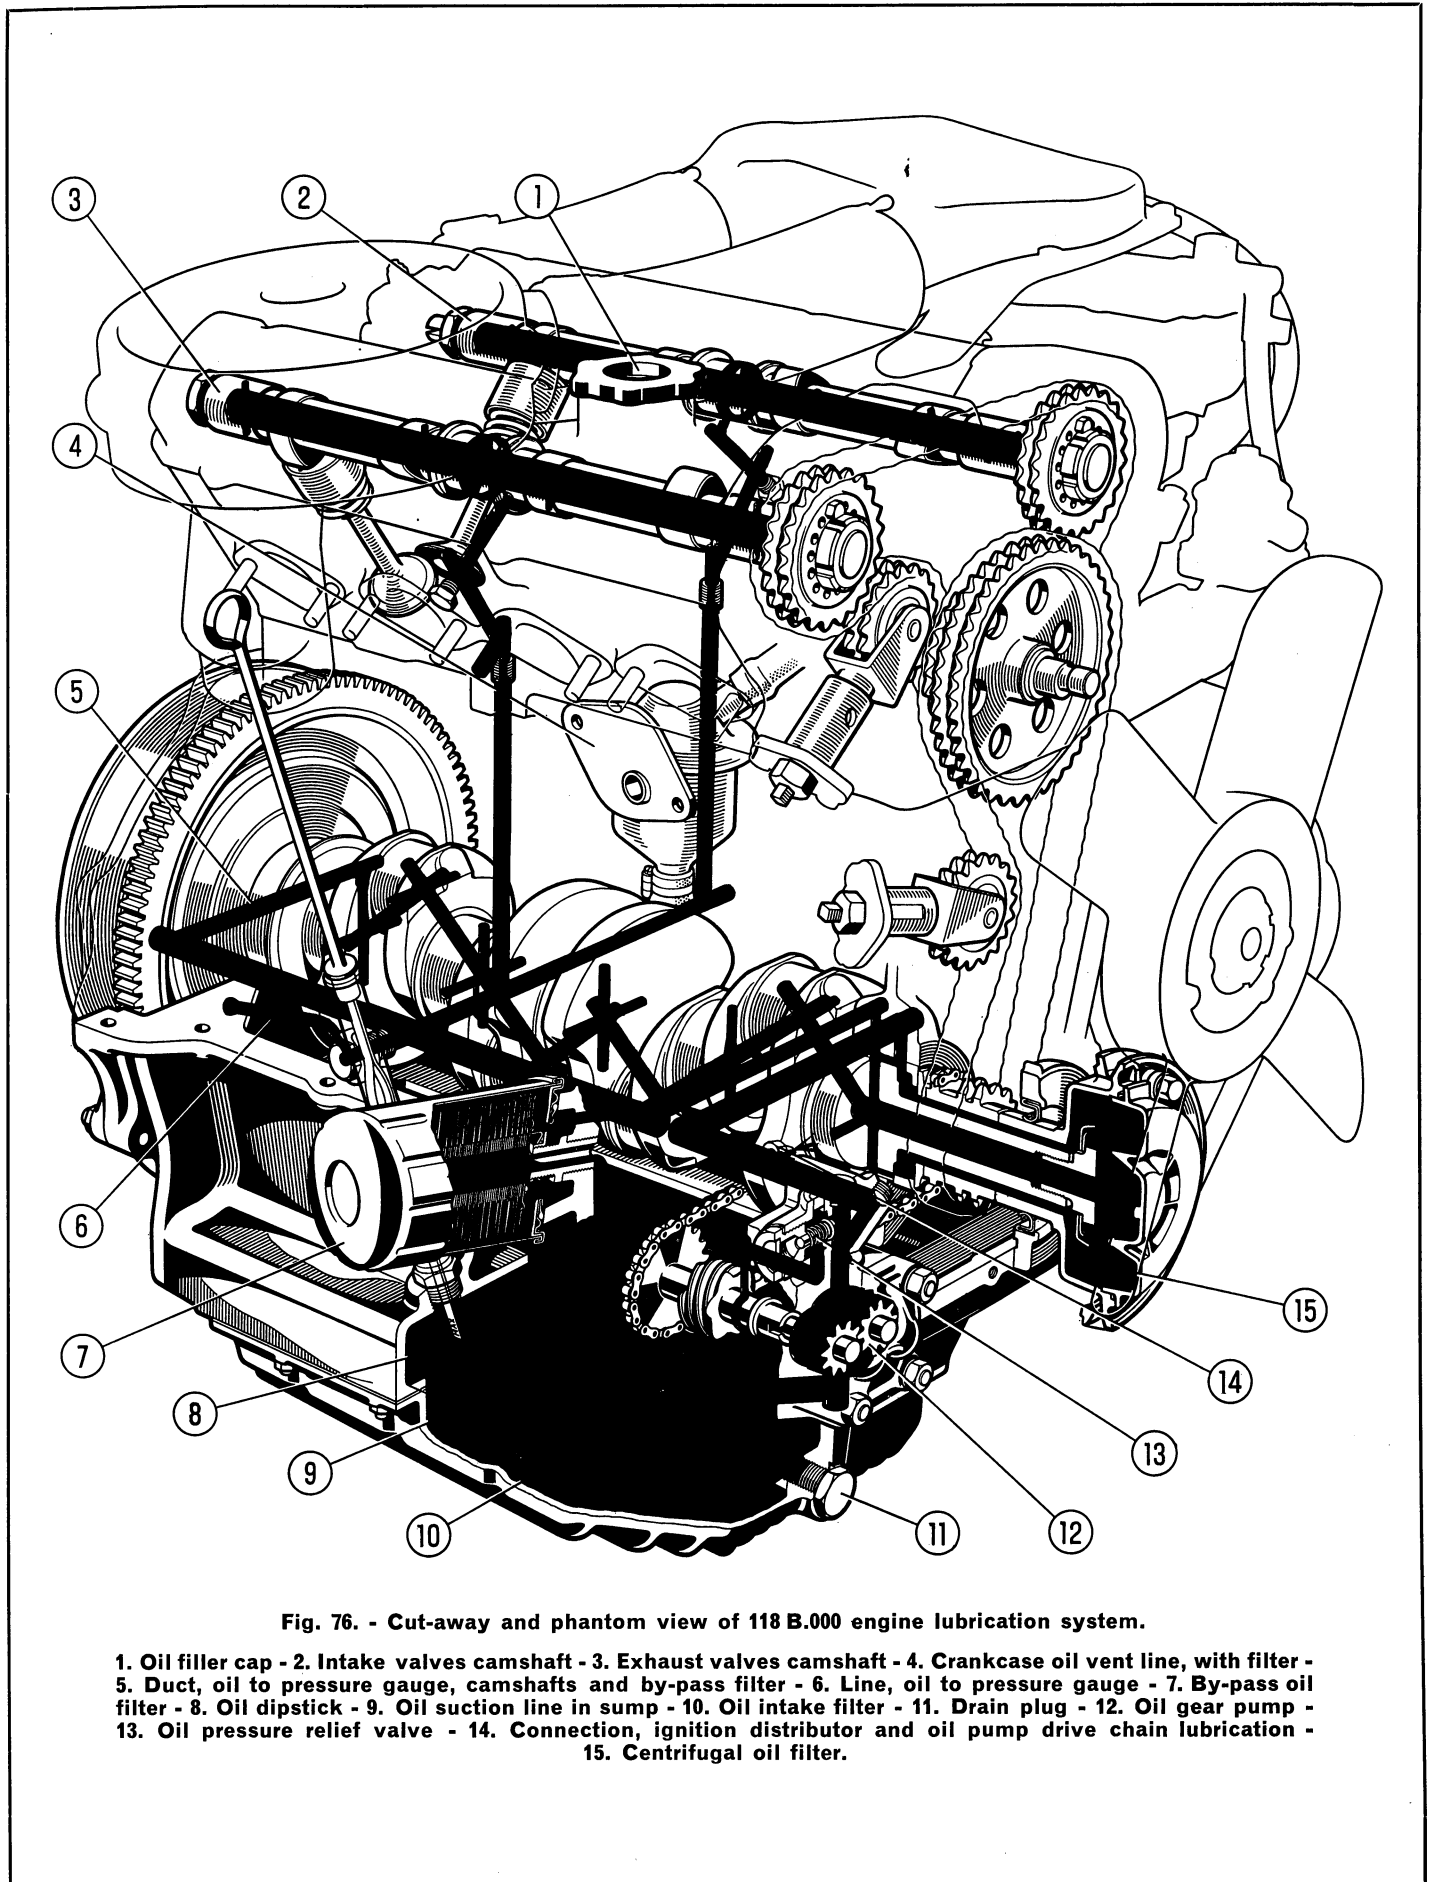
Cut-away and phantom view of 118 B.000 engine lubrication system.
